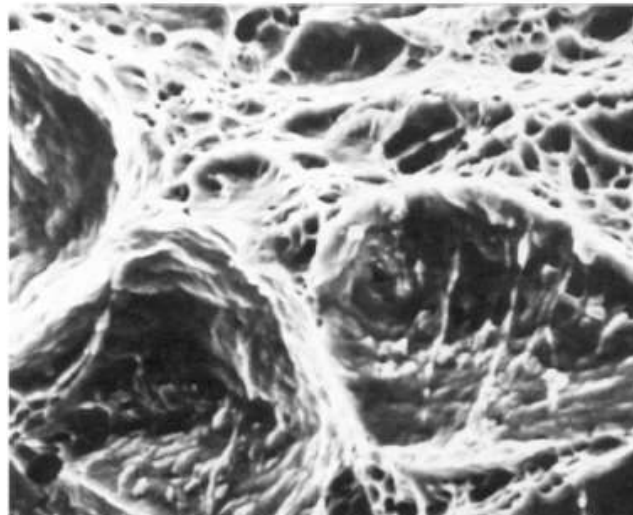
Ductile fracture in 304L stainless steel [33].
